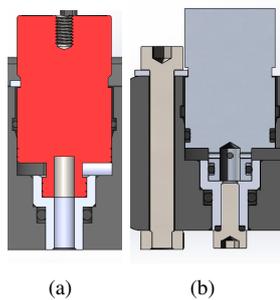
(a) section view of the Parker-Hannifin valve (b) section view of the designed manual valve assembly
